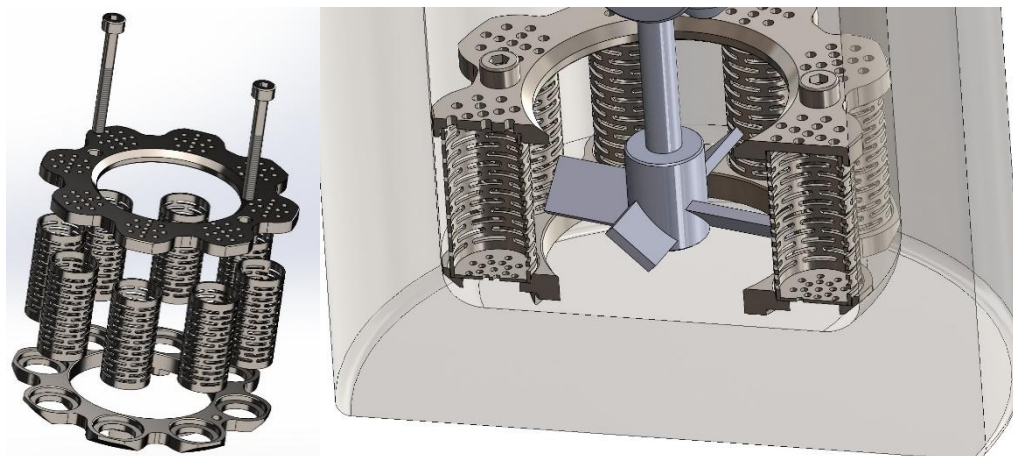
Reactor inserts design assembled; Detail of the inserts placed in the slurry reactor.
